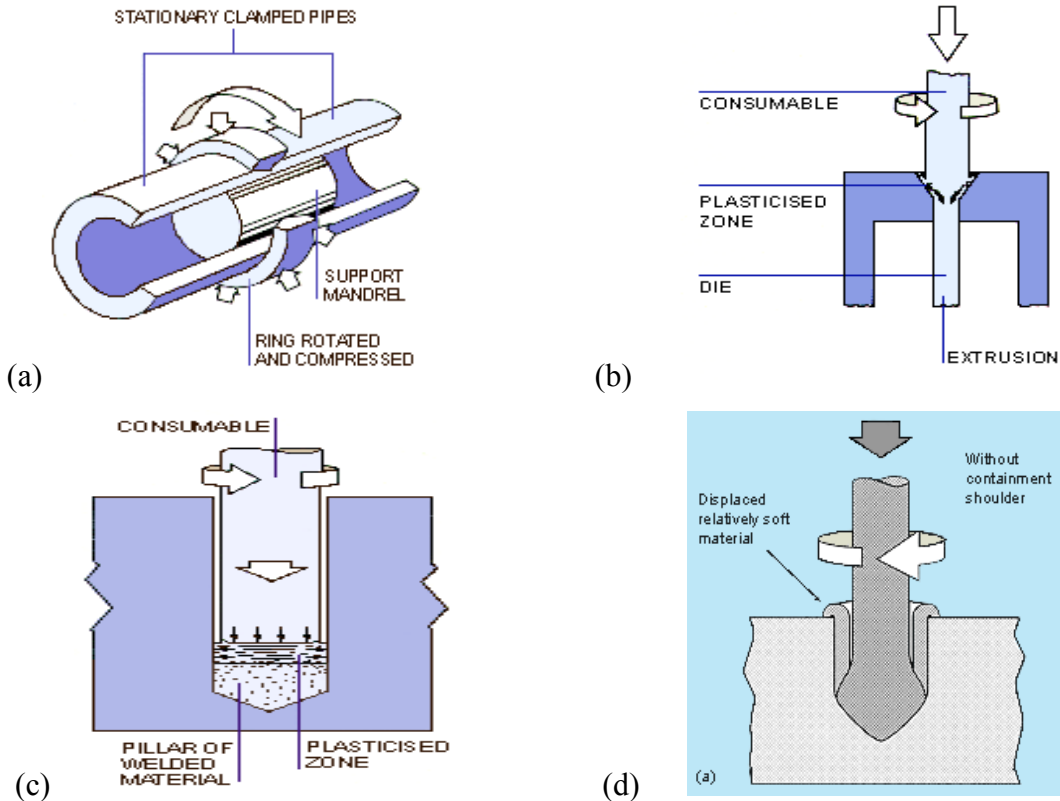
Schematic of a) radial friction welding, b) friction extrusion, c) friction hydro pillar processing d) friction plunge welding without containment shoulder [1]
